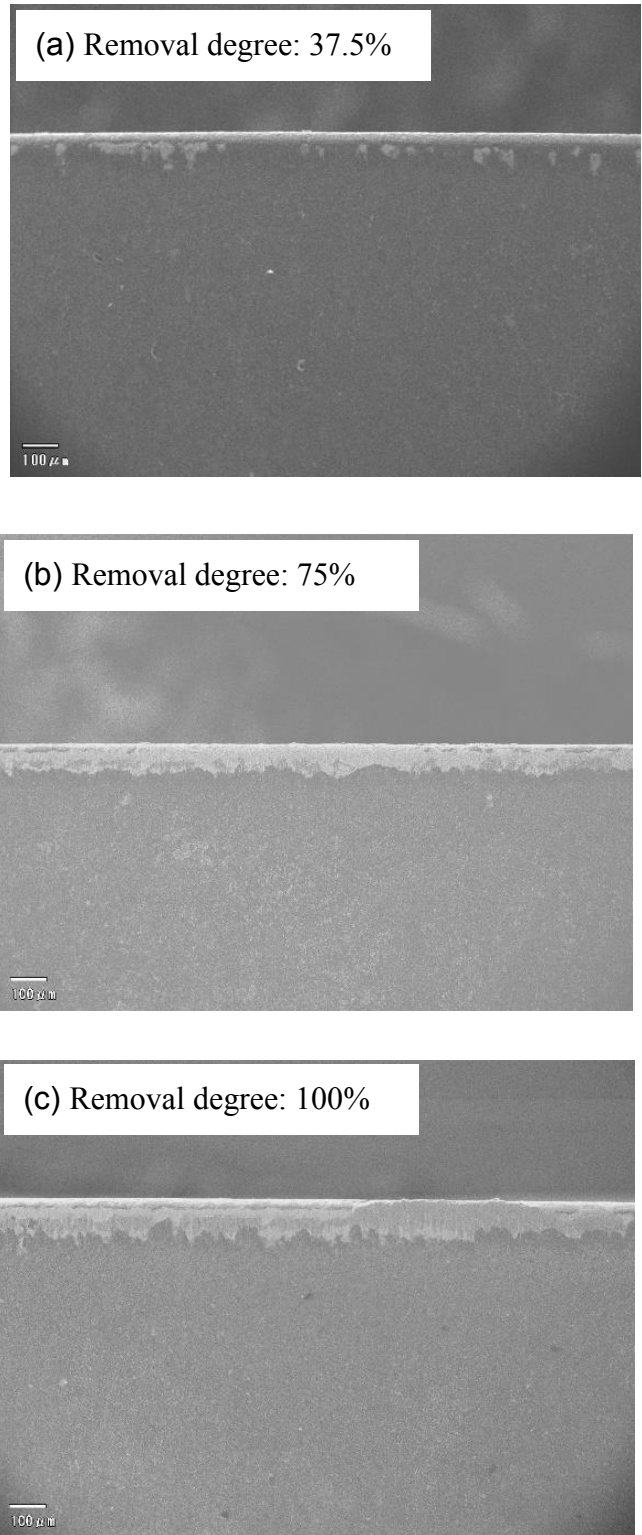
Images of flank face of taper end mill at different removal degree.
